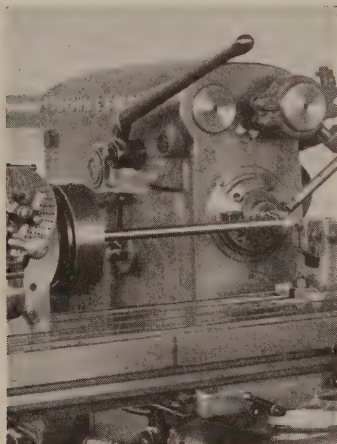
Milling a square end on a long piece. Index-head spindle is horizontal.
